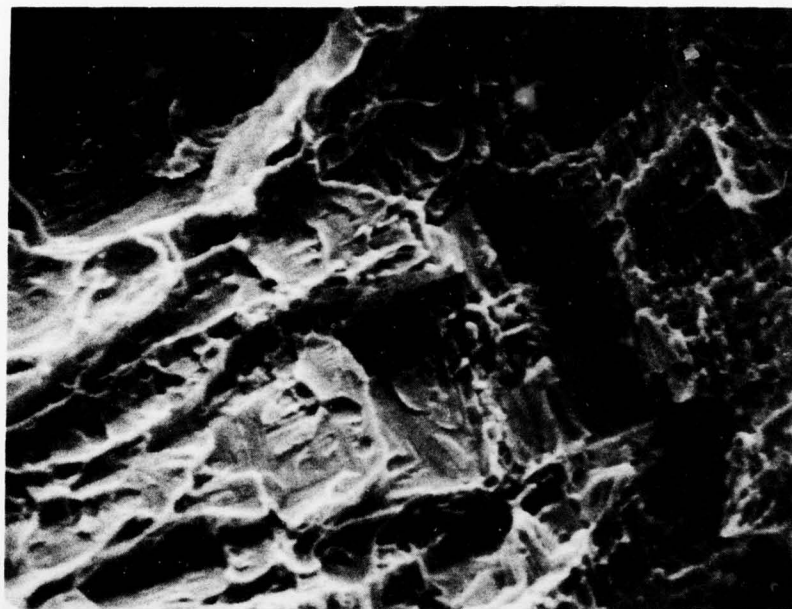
Sustained Load Crack Growth Fracture Surface of Specimen B-1-22
